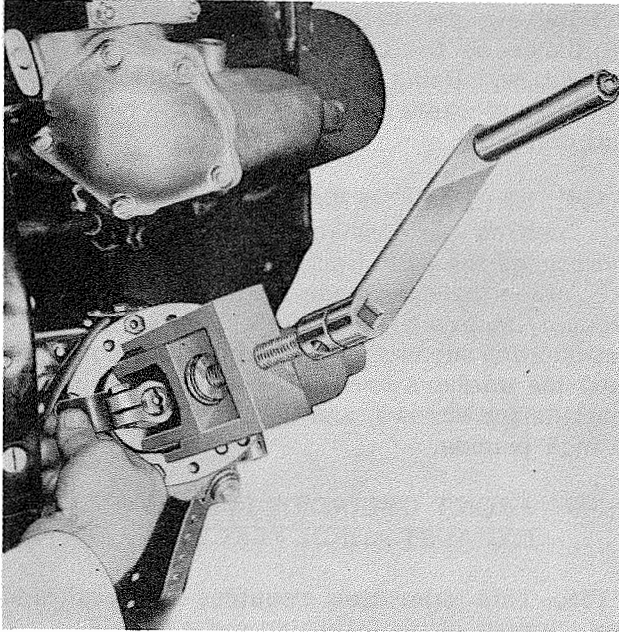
Withdrawing Metal Strip used to Position Push Rod during Rocker Arm Installation
